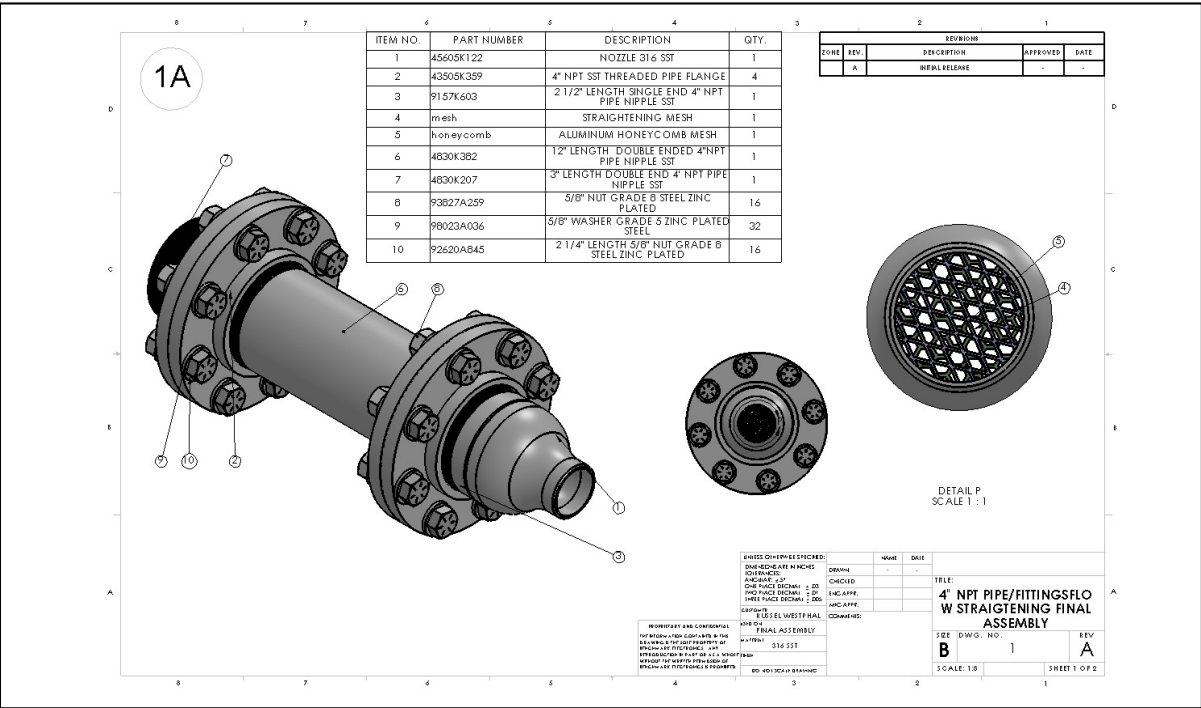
Flow straightening Bill of Materials Sub-Assembly
